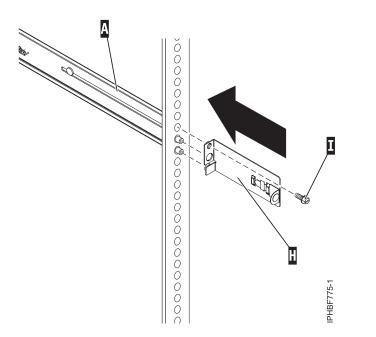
Attaching the cable-management support bracket to the back-right rail.
